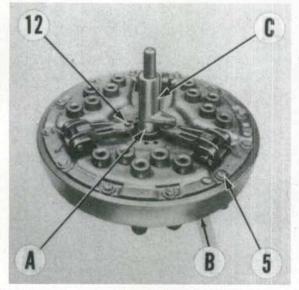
Use spacer (A), adapter ring (B), lever gage (C) and clutch fixture tool to adjust release lever height. Refer A. Spacer (No. to text.
